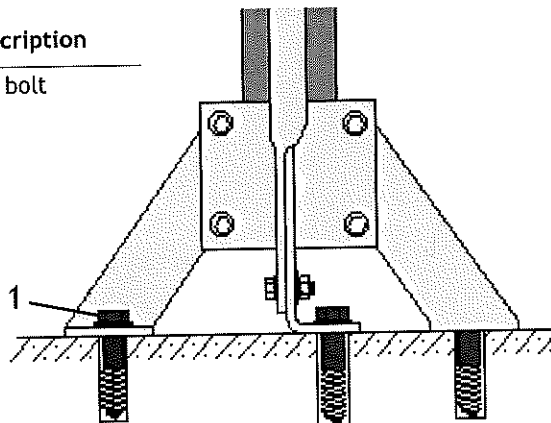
Anchoring the Mounting Base Tripod to the Floor
